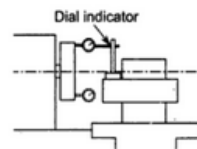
Test setup for true running of the spindle of a milling machine
